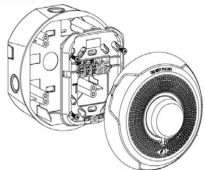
2-Wire Ceiling Mount Horn Strobes with Ceiling Surface Mount Backbox
